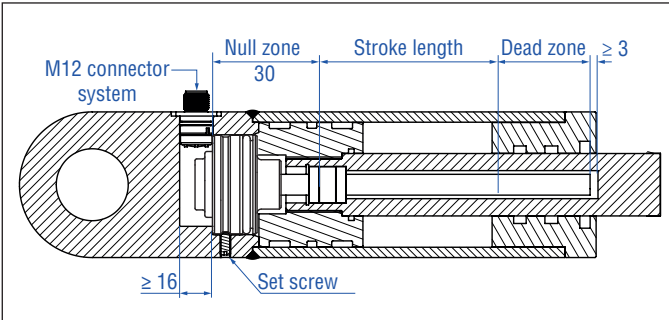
Example of In-Cylinder assembly with M12 connector system
